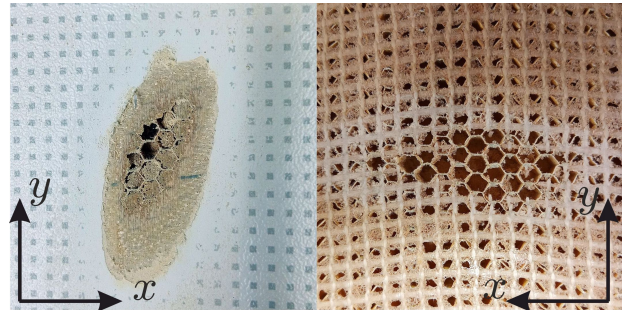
Sanded surface of the lining panel; left: front side; right: back side.
